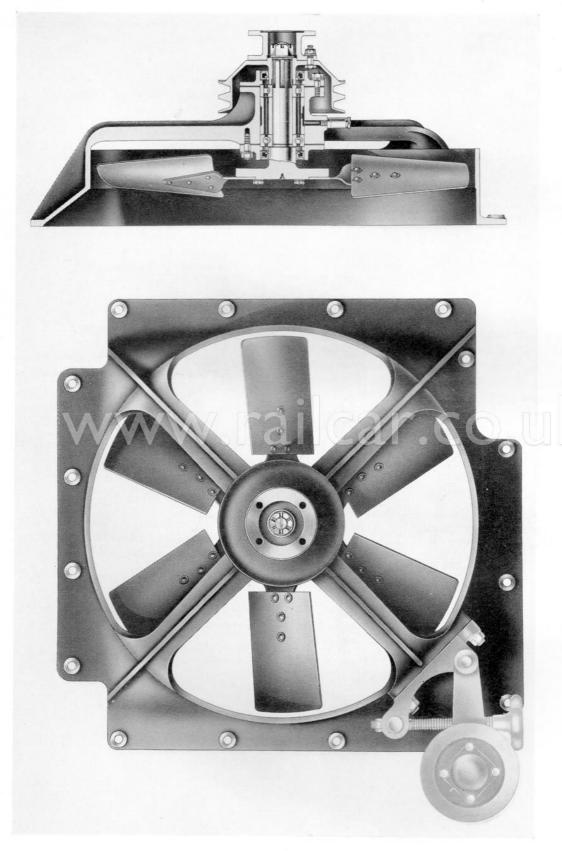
SECTION THROUGH FAN AND FAN DRIVE
